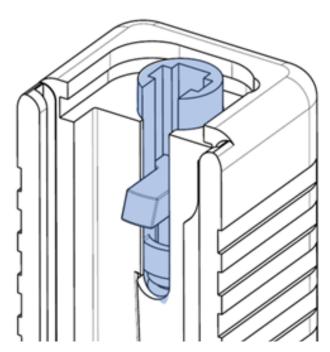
Firing Pin Assembly with its uncompressed Firing Pin Spacer Sleeve standing out of the Slide.
